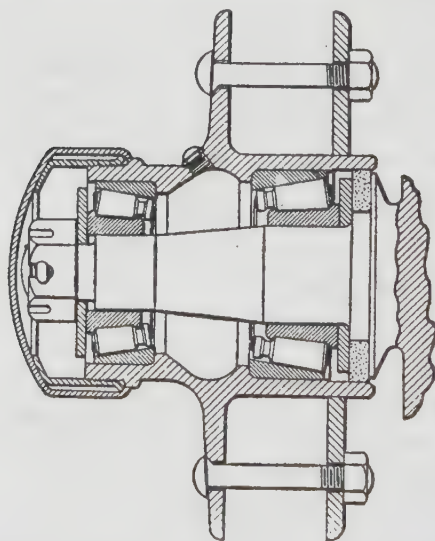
MOUNTING OF FRONT WHEEL ADJUSTABLE BEARINGS.
